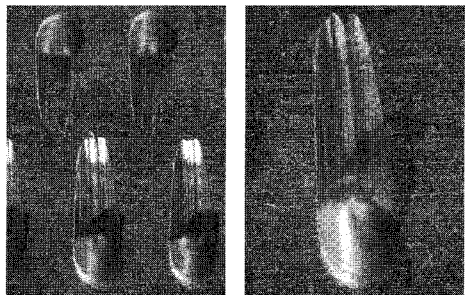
Photograph of tooth like projections on the strap engaging surface by rolling process
